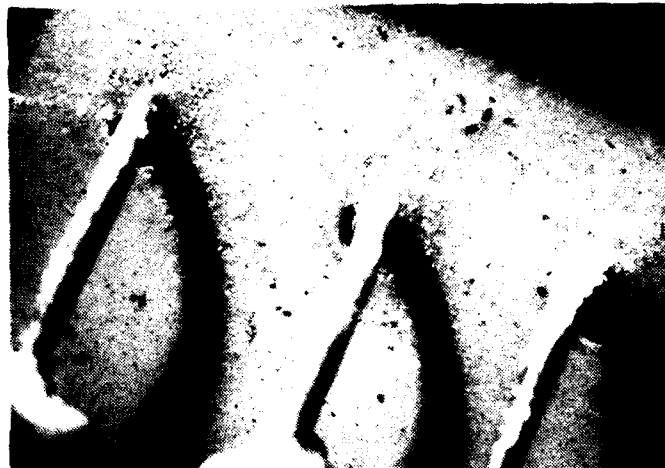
Corrosion Forming on PCB One Day After Test B-1.
